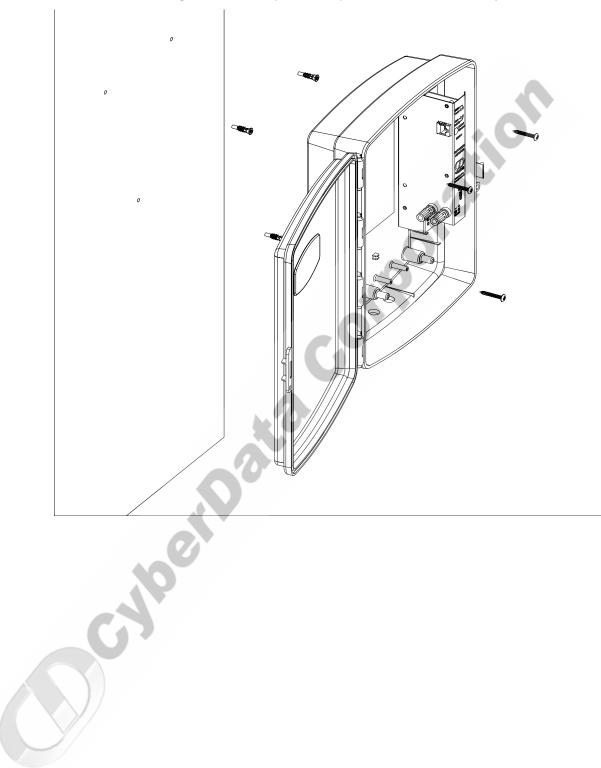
Loudspeaker Amplifier Enclosure Assembly
